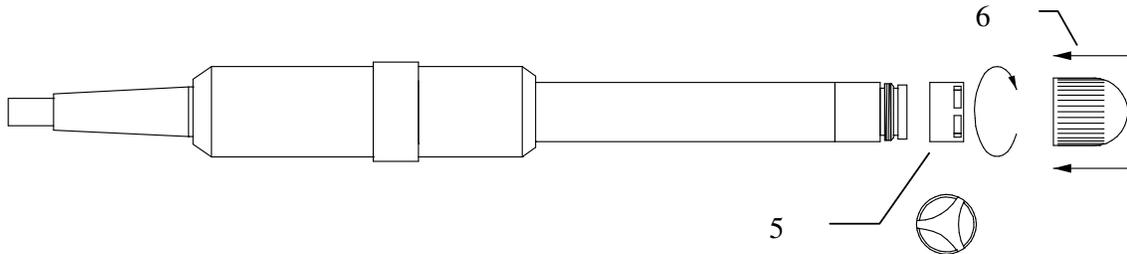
Assembling of weatherproof accessories – step 3.
